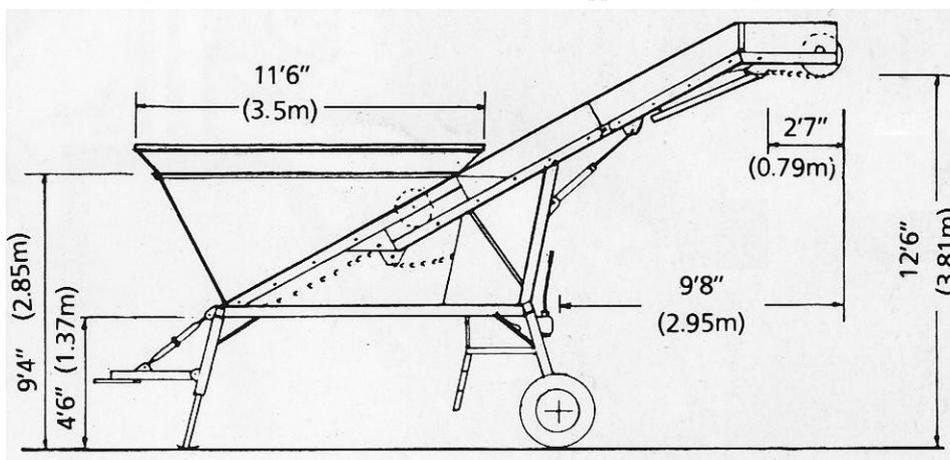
Schematic view of the Armer Salmon Hippo beet cleaning machine
